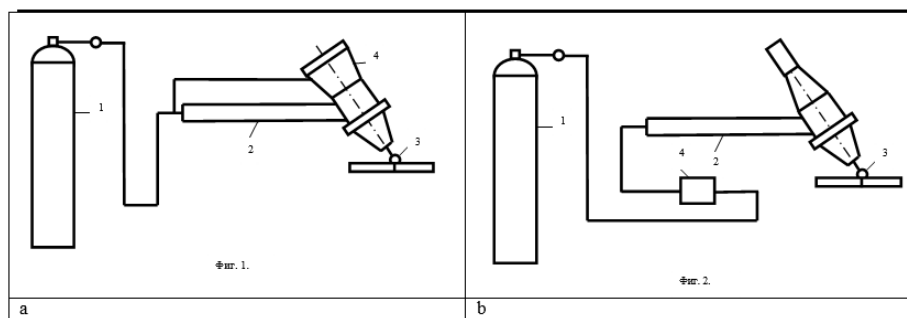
The scheme of the welding process with the use of the feeder installed on the welding torch (a) and the feeder of independent type (b)
